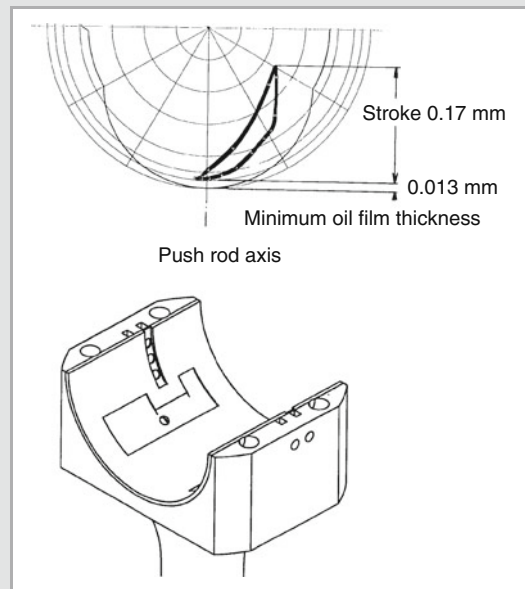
Simulation and measurement of oil film thickness for a crosshead bearing
